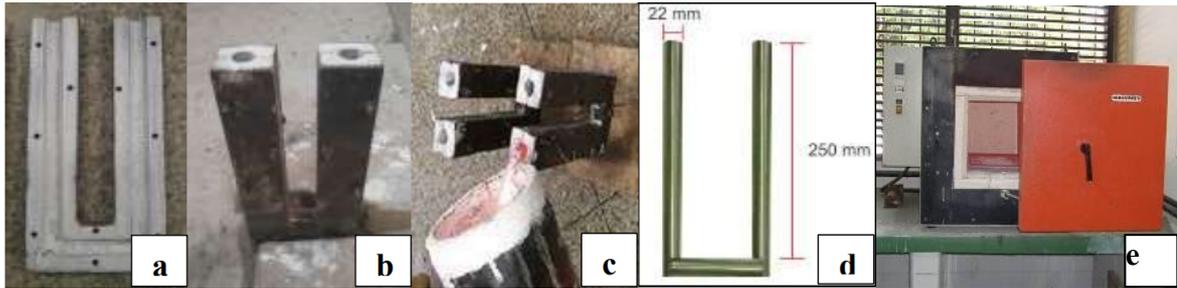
Kaolin-coated U-type mold (a), assembled (b), U-shape mold casting (c), ingot dimensions (d) and muffle furnace used in process (e).
